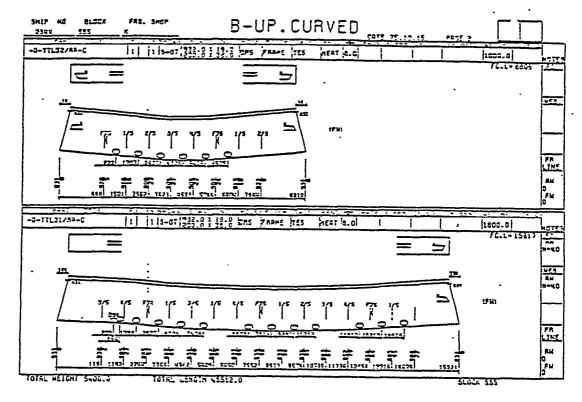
Parr Dimension Plan of Cut-out Frame [by Dot-printer)
